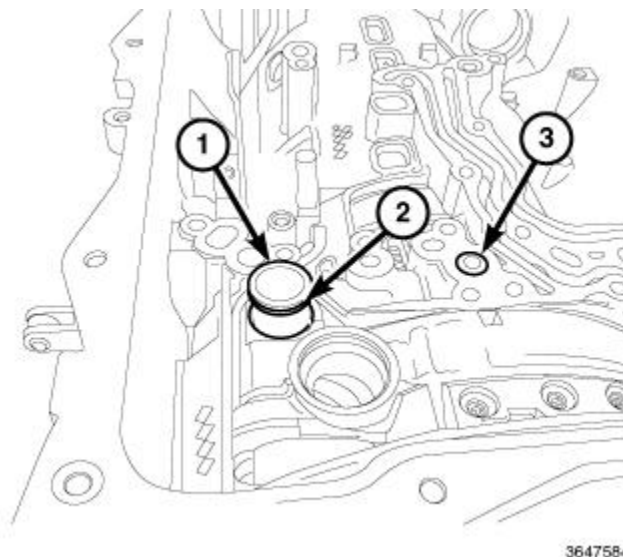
Fluid Port, Two O-Rings, Compression Seal
